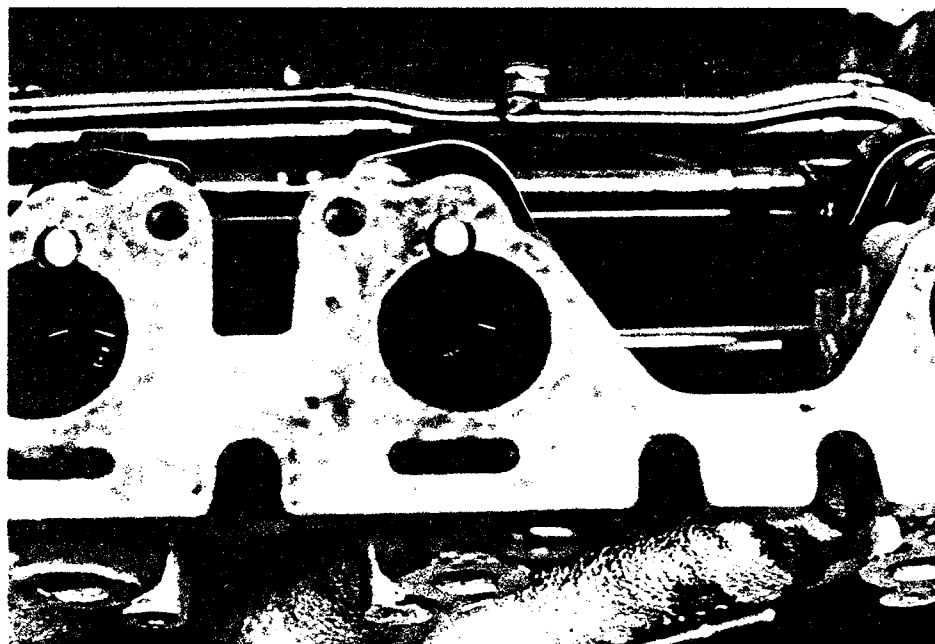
Port View of Intake Manifold with Gasoline and Alcohol Fuel Injector Nozzles Visible
